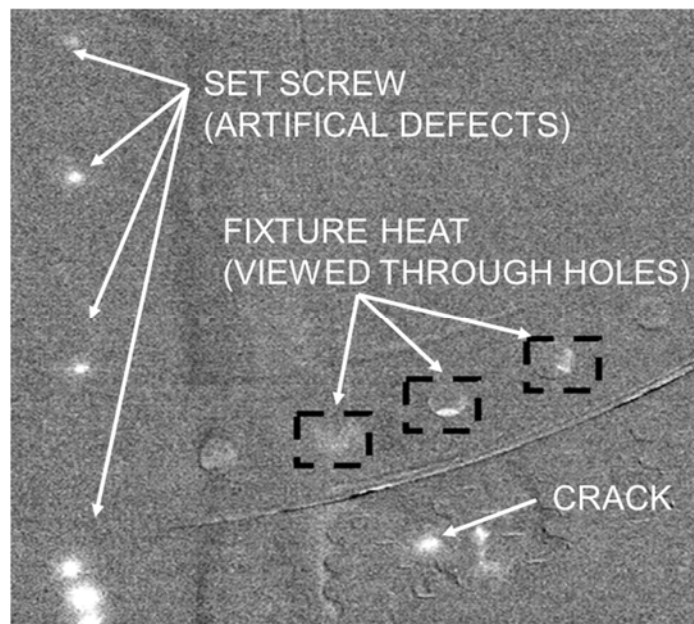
Example of Fixture Heating on CIS JT8D Disk
